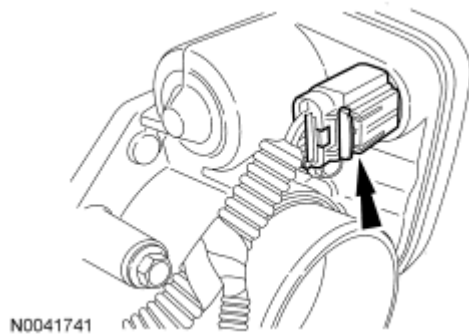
Locating Electronic Throttle Body Electrical Connector
